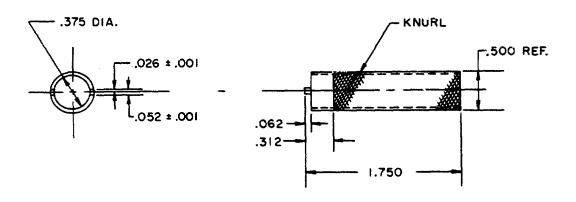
Two Piece Eccentric Tool (Sheet 1 of 2)
